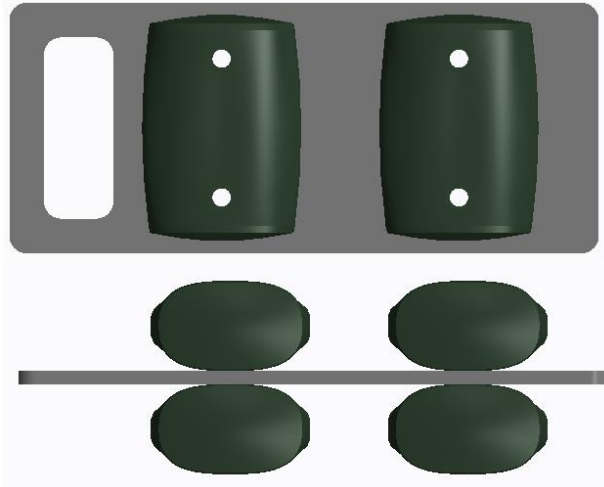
Test plate configuration. This is the test plate that will be used for the compression test of the Product_Y bumper.
